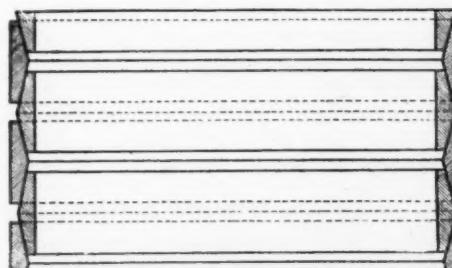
BUFFER RING SPRING, ORIGINAL DESIGN
